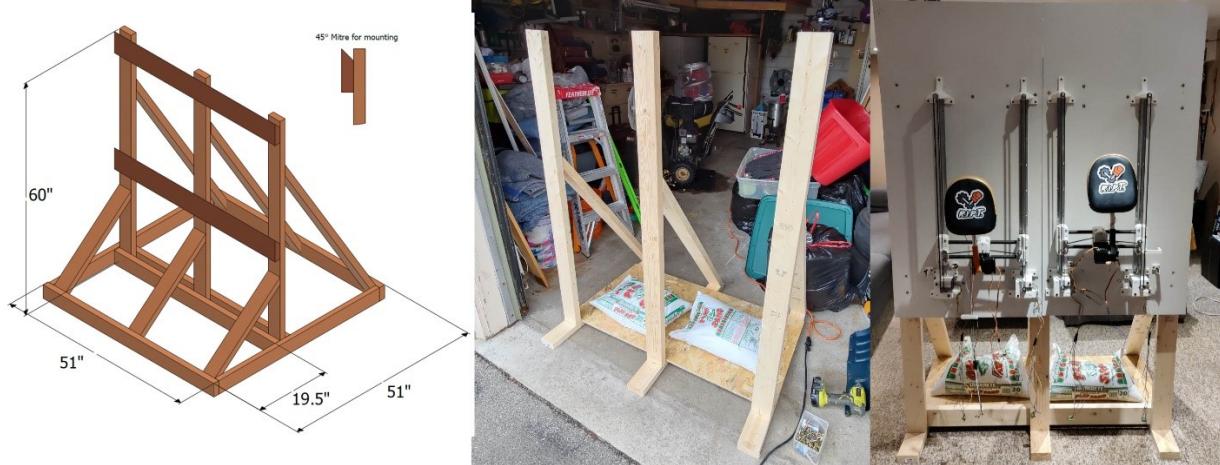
Left: frame plan. Centre: frame construction. Right: frame implementation
